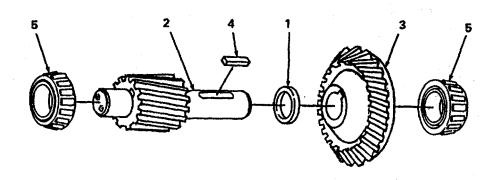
Installation of Bevel Gearon Intermediate Shaft.
